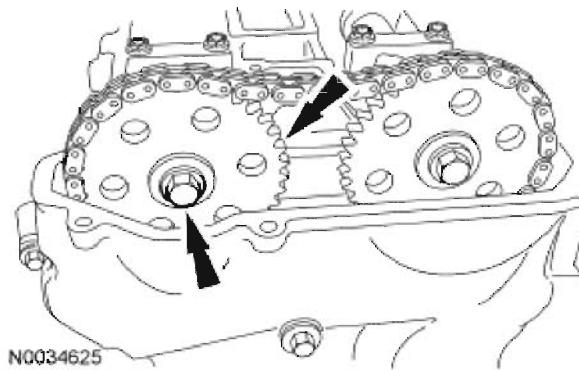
Locating Timing Chain On Intake Camshaft Drive Gear
